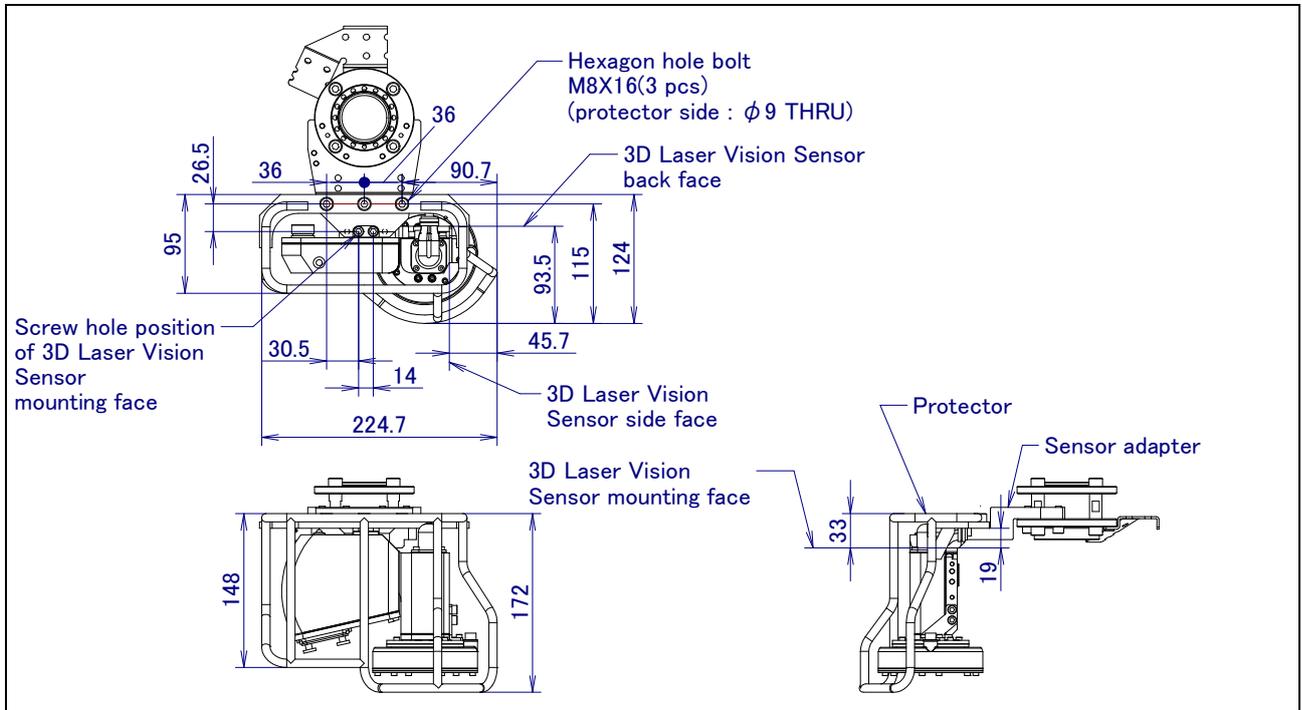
(b) External dimension of protector for 3D Laser Vision sensor (with LED light)
